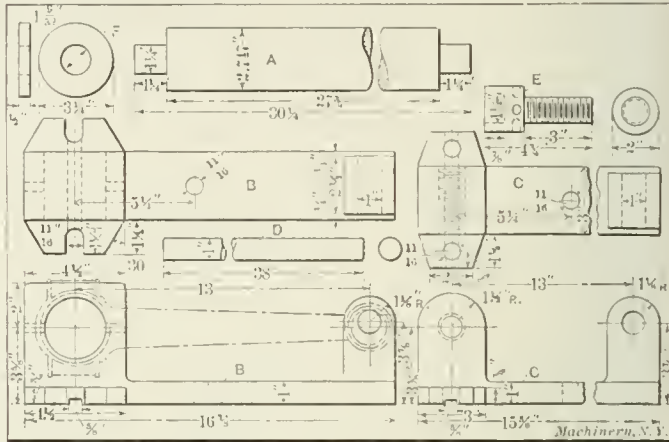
Jig for the Fifth Operation, which consists of Sawing off the Caps and Milling the Bolt-head Seat
